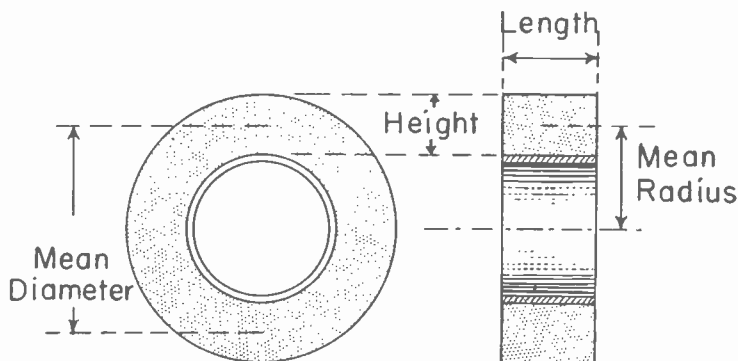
How and where to measure the dimensions of a multi-layer coil.
